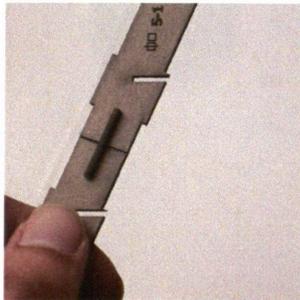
Finding the right tolerance in 1/16" chipboard
